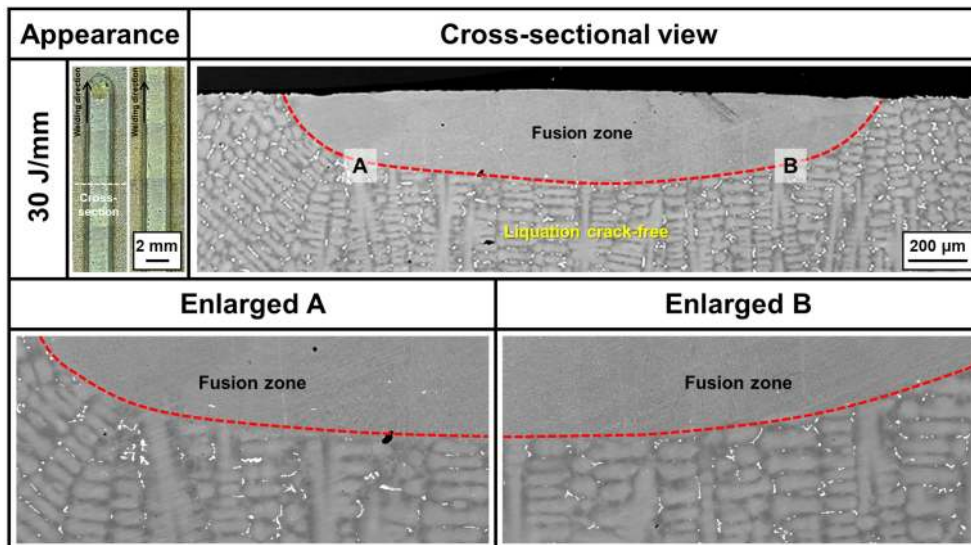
Surface appearance and cross-sectional microstructure of the bead-on-plate welds, obtained via LBW (heat input: 30 J/mm), for the as-cast CM247LC specimen.
